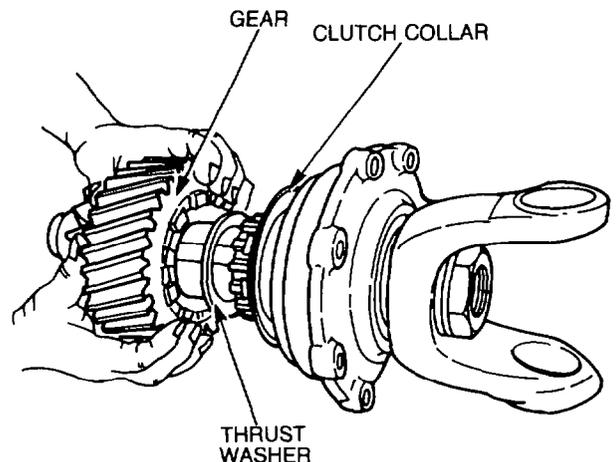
Installing Clutch Collar, Thrust Washer and Drive Gear
